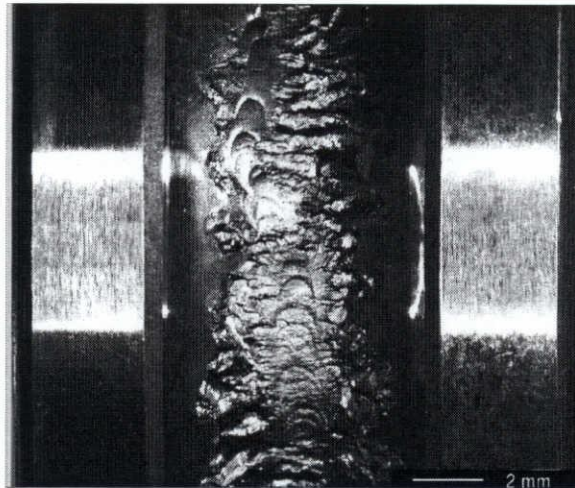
Region of failure by rolling contact fatigue ( Ball bearing 6206 ).
